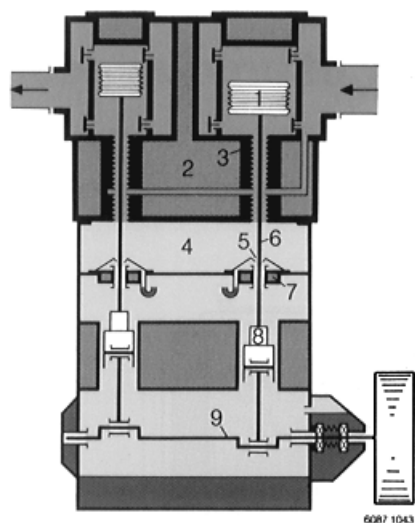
Labyrinth piston compressor with a gastight crankcase and a mechanical crankshaft seal. This design is used for compression of gases that are compatible with the lubricating oil (e.g., for hydrocarbon gases, CO, He, H₂, Ar) and where no process gas may leak to the surroundings. The suction pressure is limited by the design pressure of the crankcase. (*Sulzer-Burckhardt, Winterthur and Basel, Switzerland*)
